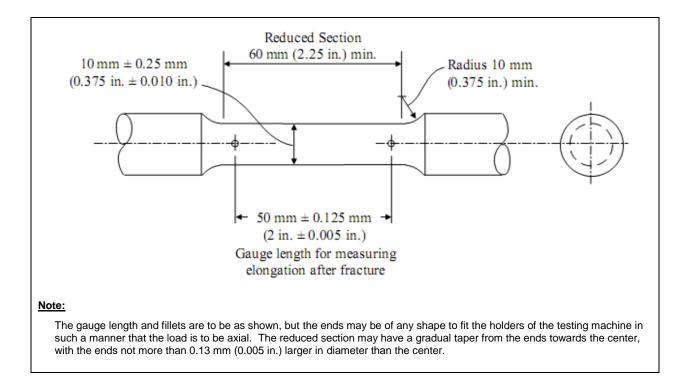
Standard Round Tension Test Specimen with 50 mm (2 in.) Gauge Length
